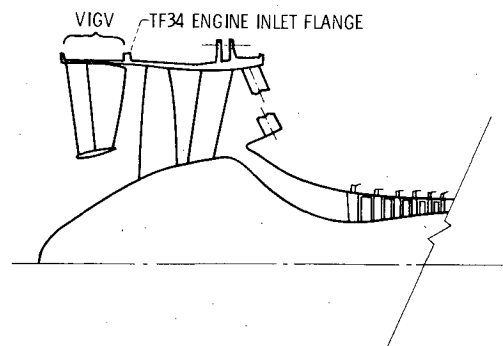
Cross section of VIGV installed ahead of TF34 turbofan engine.
